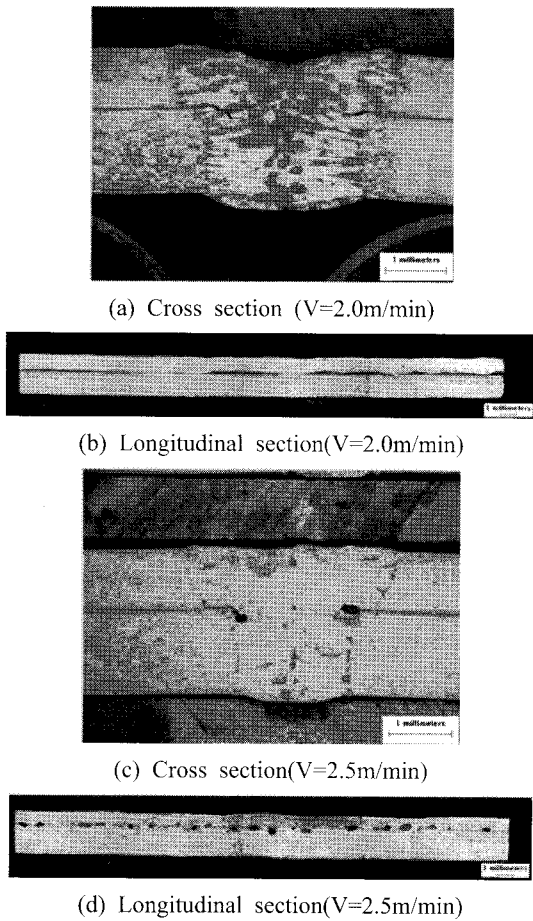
Cross section image of 6K21 autogenous weld metal.
